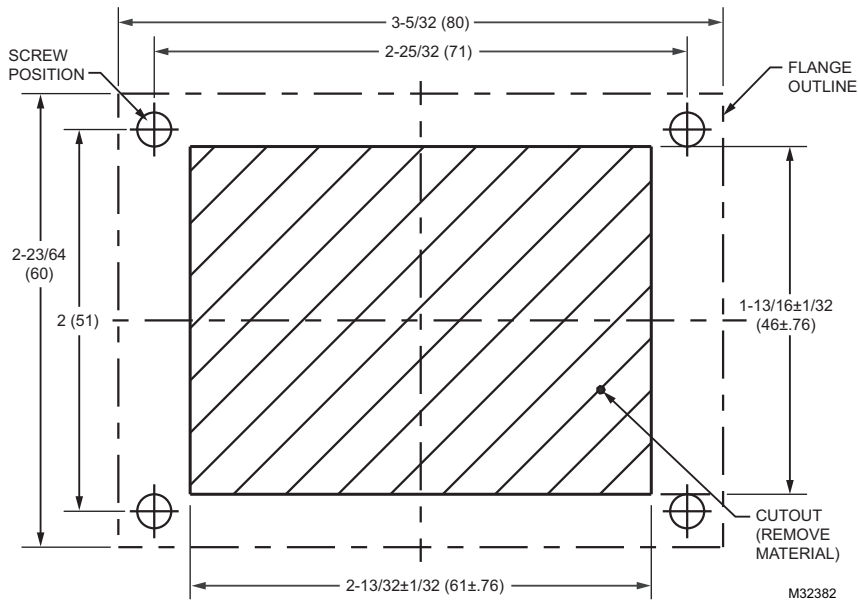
Mounting Template to Scale (1 in. = 1 in.).
